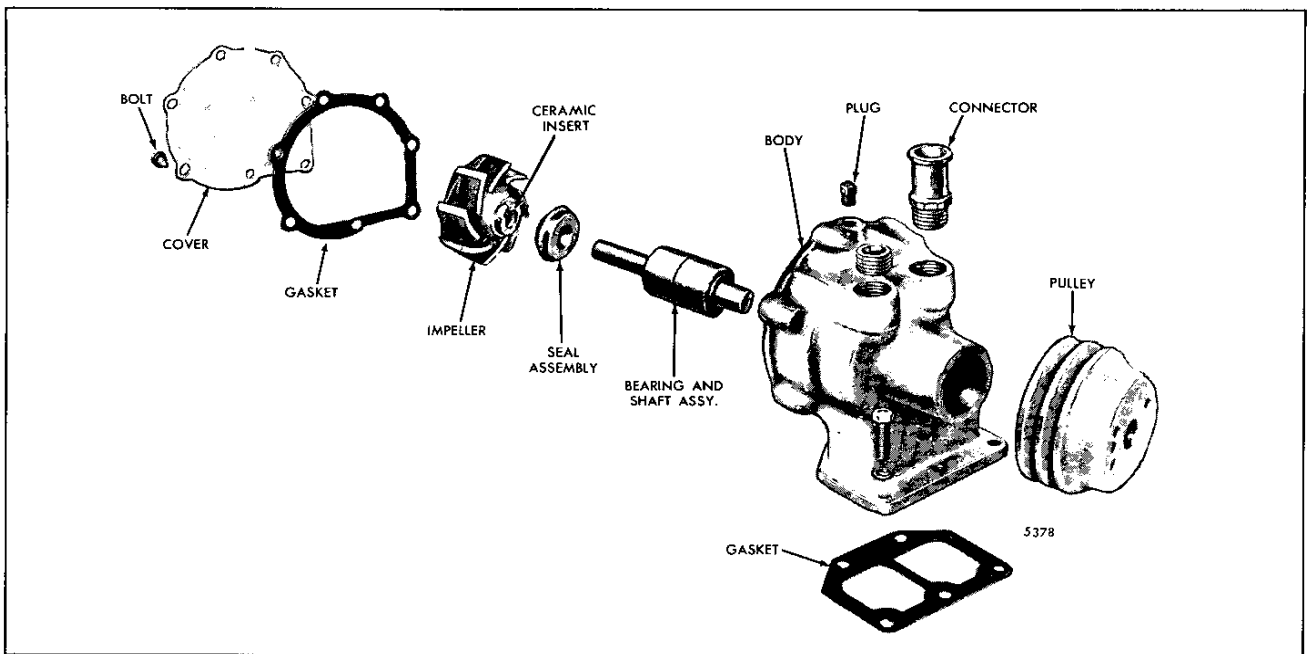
Details of Current Water Pump Assembly with Ceramic Seal
